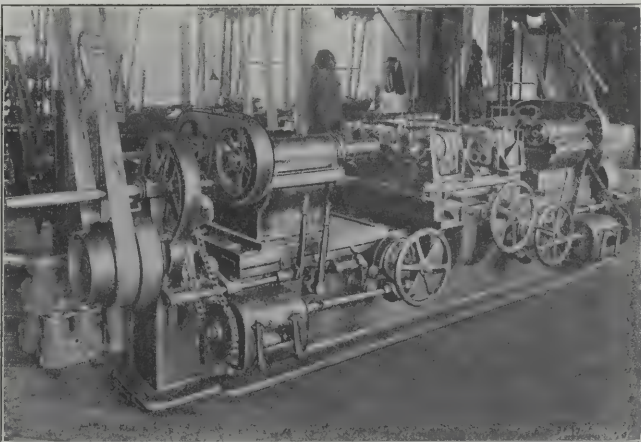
Four-cylinder Boring Machine with Revolving Table
